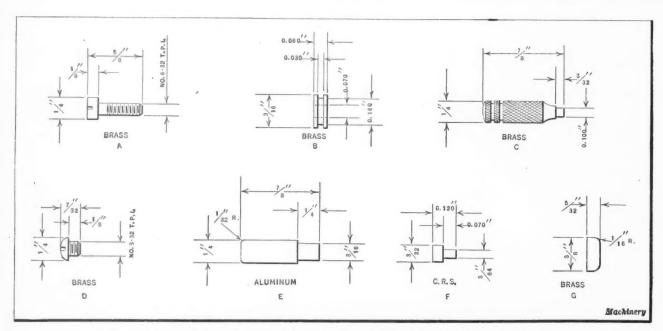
Examples of Brass, Aluminum and Cold-rolled Steel Parts produced in Three Seconds or Less
